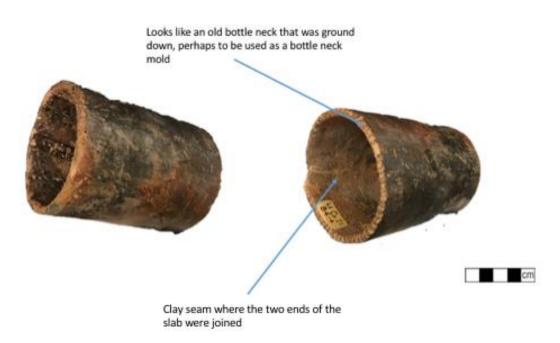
Possible bottle neck mold used with the clay slabbing technique.
